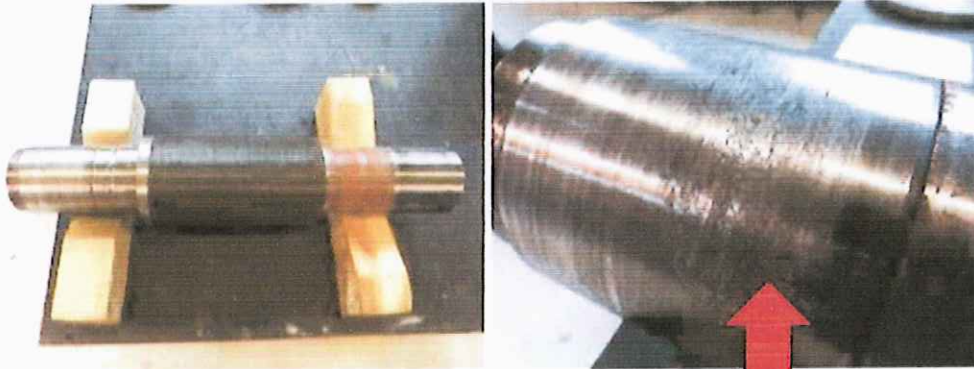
+ 17: The rotor shaft with bushings R420 is corroded and damaged
